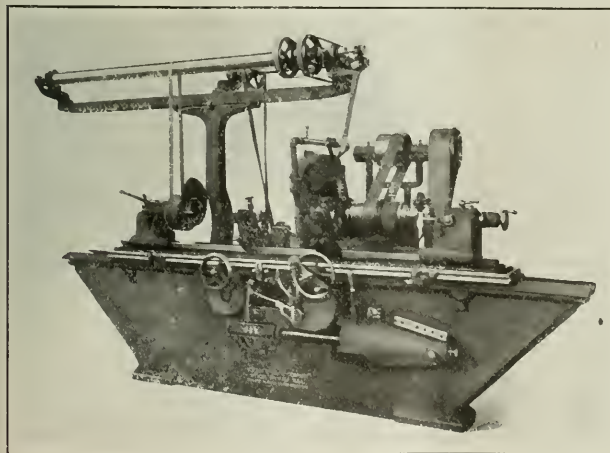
"Autopart" Regrinding Machine with a Power Table Traverse
